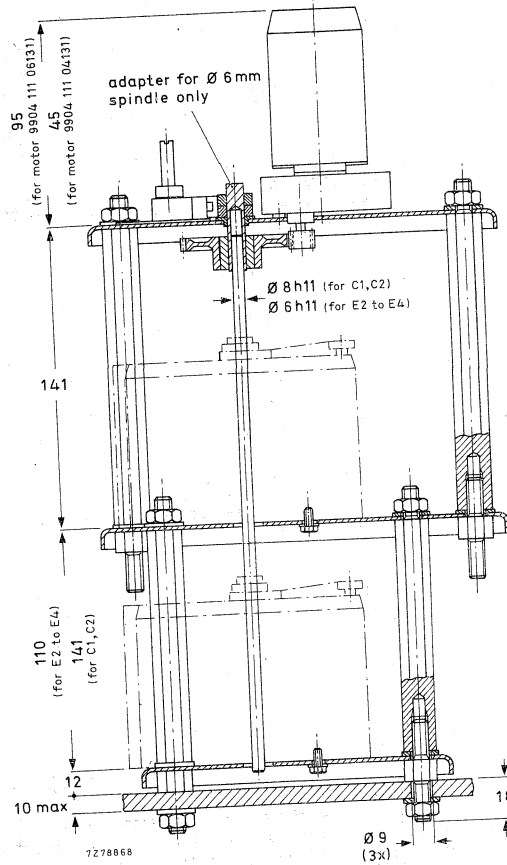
Motor drive for two ganged transformers with size code C1, C2, E2, E3, E4.
